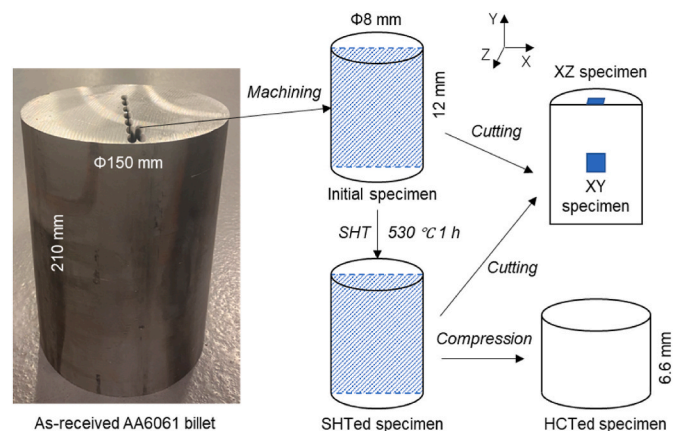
Schematic of initial, SHTed and HCTed AA6061 specimens, and XY and XZ specimens after cutting.
